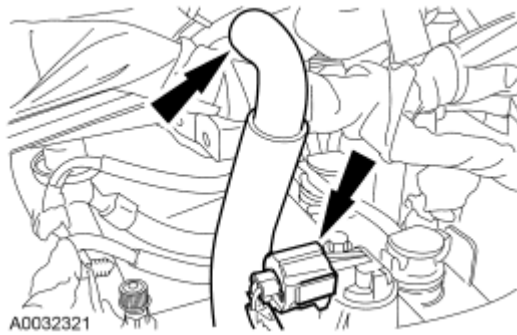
Locating CKP Sensor Electrical Connection
